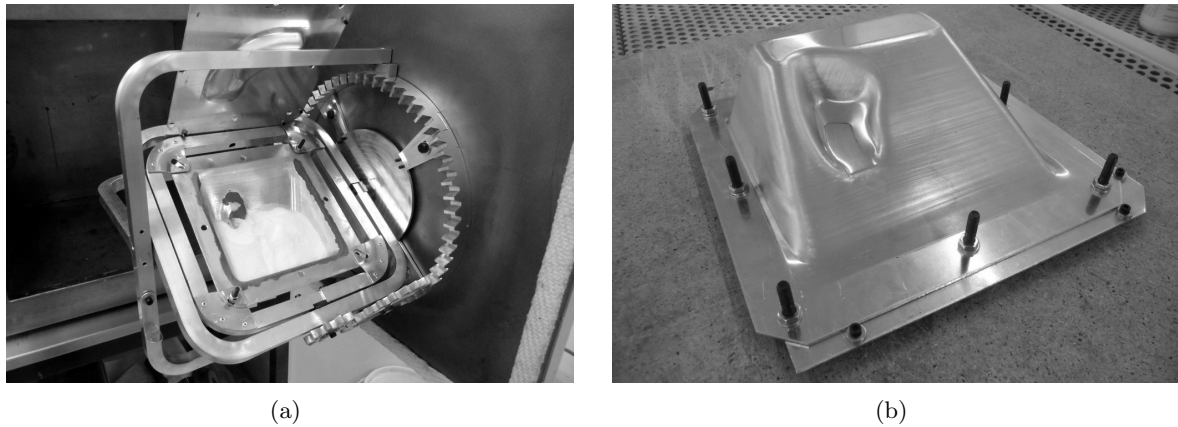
Rotomoulding operation with the finished SPIF mould: (a) LDPE powder fill up mounted on the rotomoulding device (b) close mould after moulding operation
